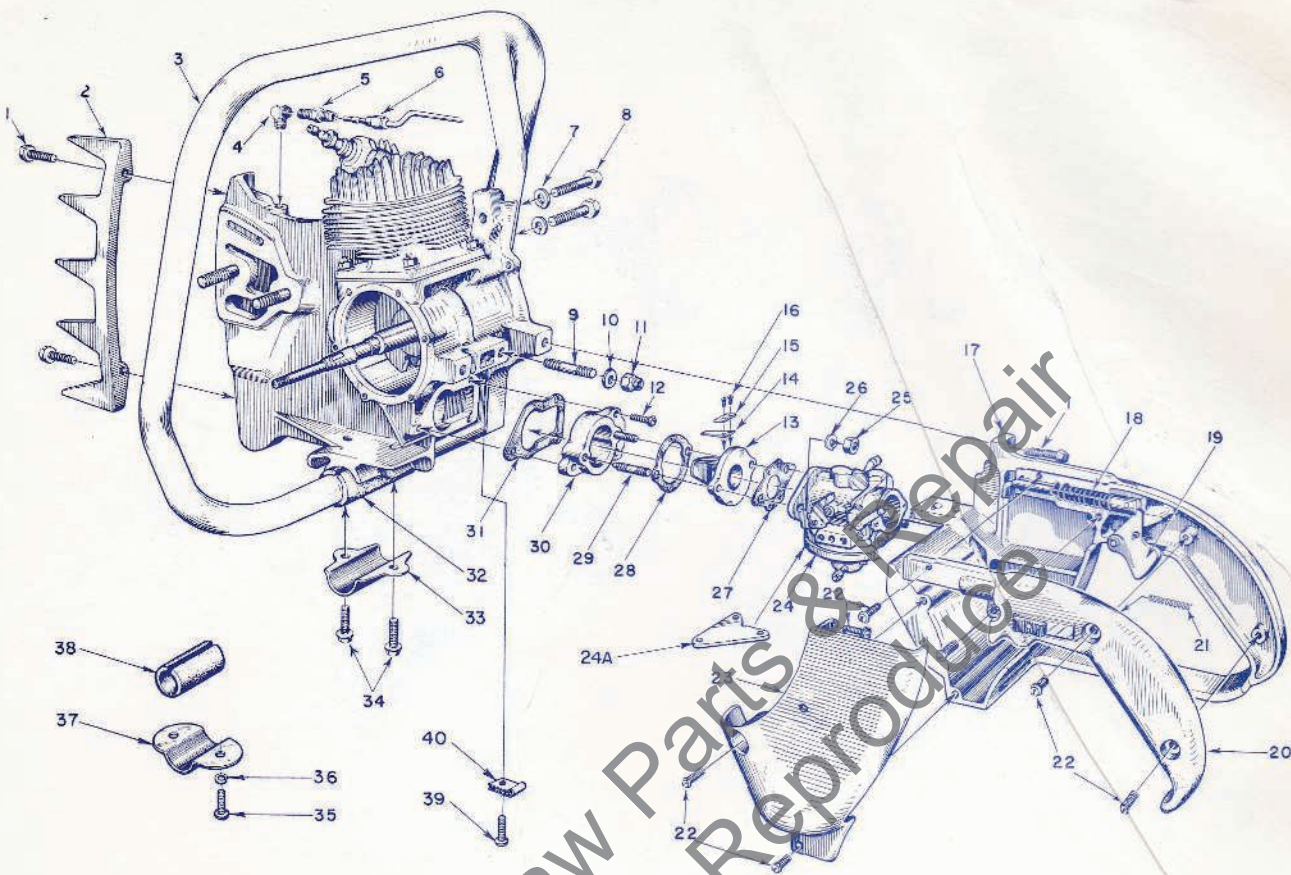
HANDLE, GRIP AND REED VALVE PARTS
